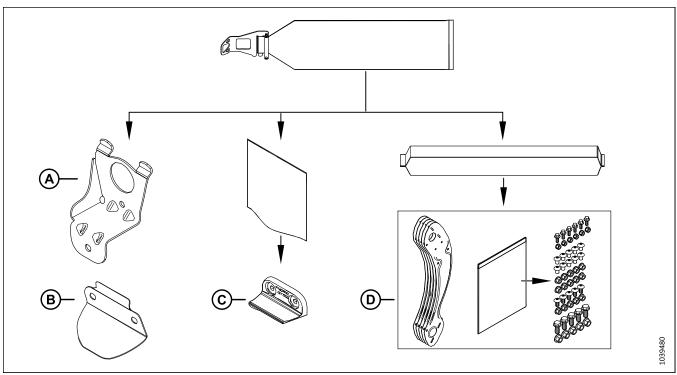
Reel Endshield Parts Bag (MD #340985)
